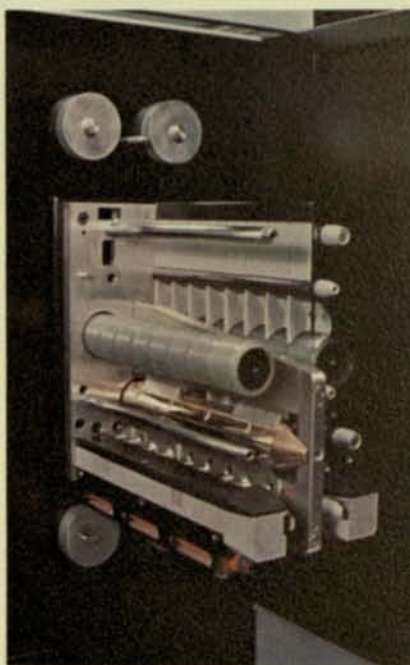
Multiple Drive Block Assembly with One Group of Drive Blocks Removed
